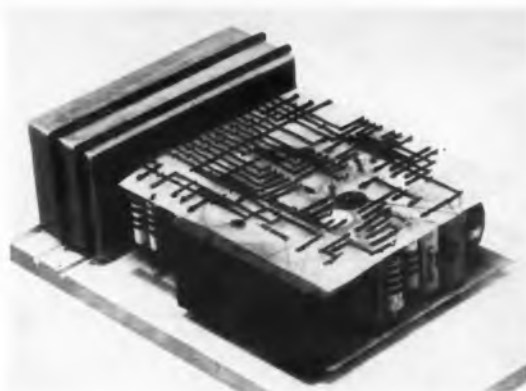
Assembled circuit module (before potting) showing metallic heat conductor to transfer heat from high-dissipation components.
